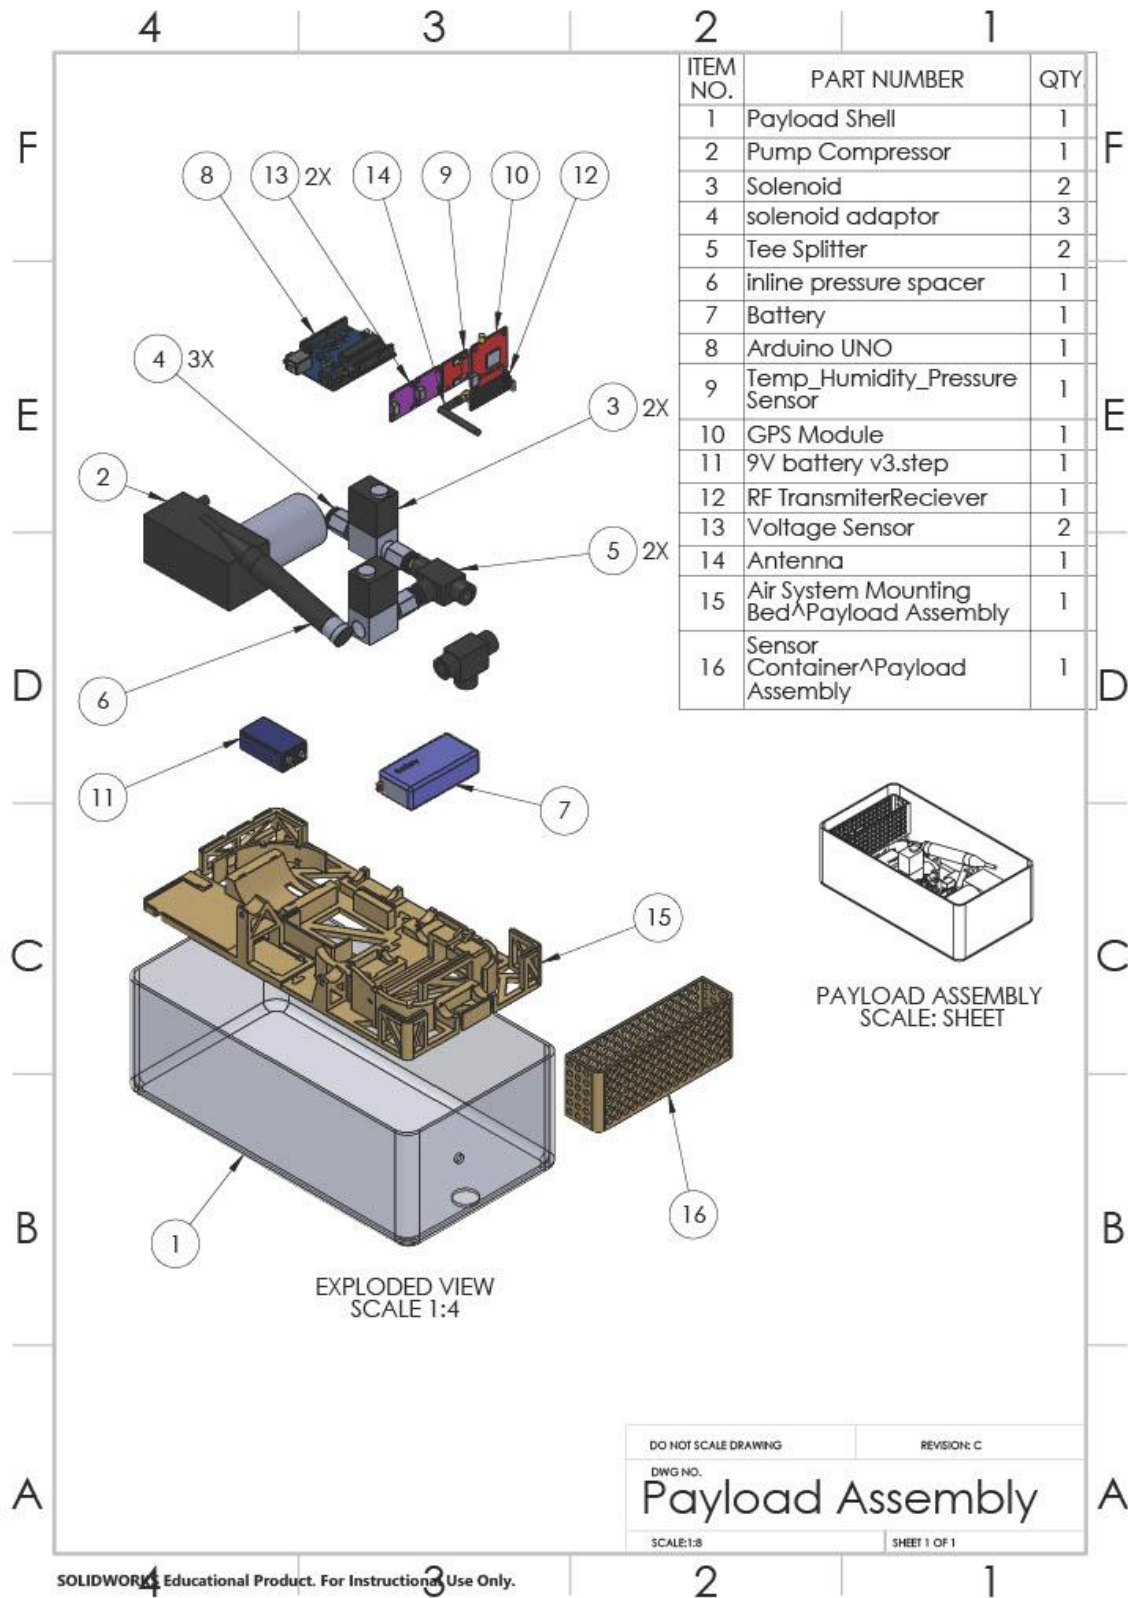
Exploded View of CAD Model and BOM of Main Parts
